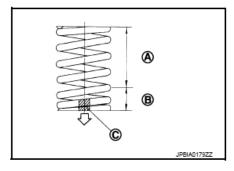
Identifying Wide And Narrow Pitches Of Valve Spring Courtesy of NISSAN MOTOR CO., U.S.A.
